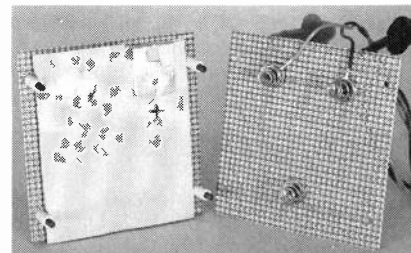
THE BATTERY JIG uses two pieces of perforated construction board, screws, spacers, and springs from an AA-cell holder. Nylon screws hold the contact springs to the fixture.
